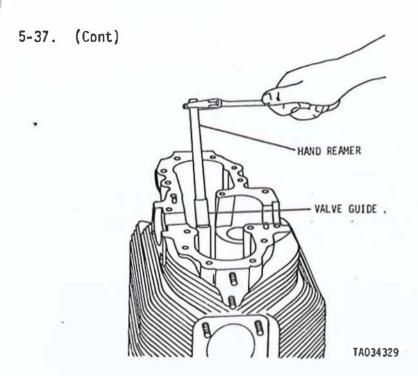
Reaming intake valve guide, using hand reamer and reamer bushing.
